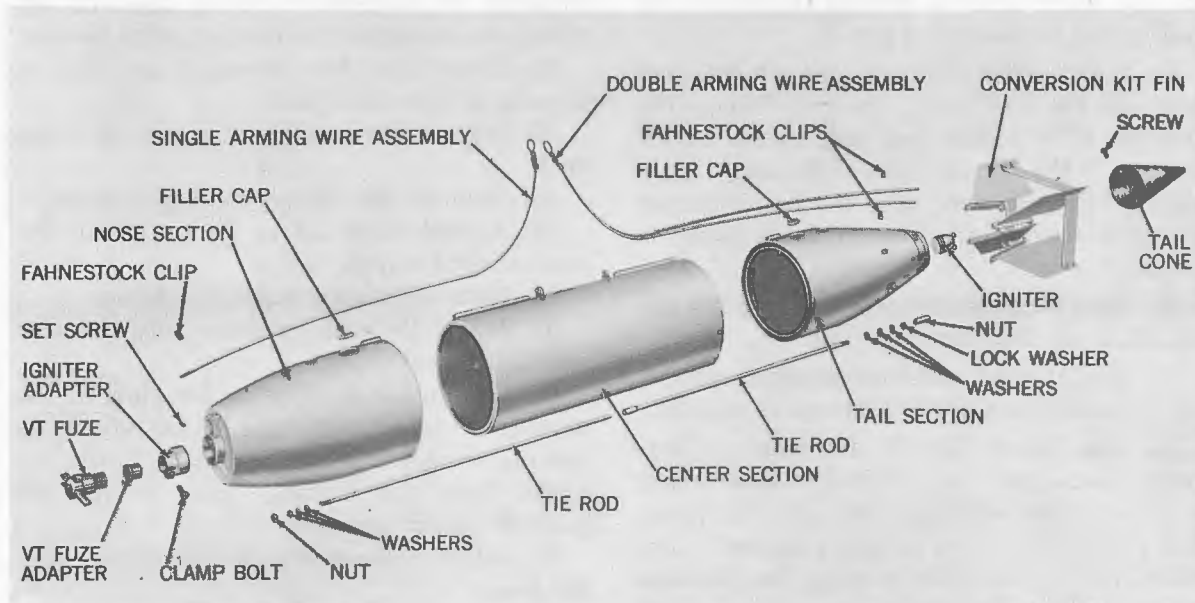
750-lb Fire Bomb Mk 77 Mod 0 with Bomb Conversion Kit Mk 19 Mod 0, Exploded View.
